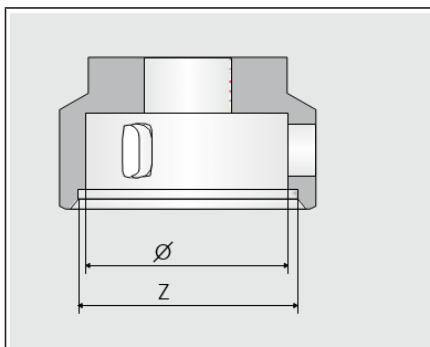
Plunger dia. = drawing diameter Z = pre-centring
